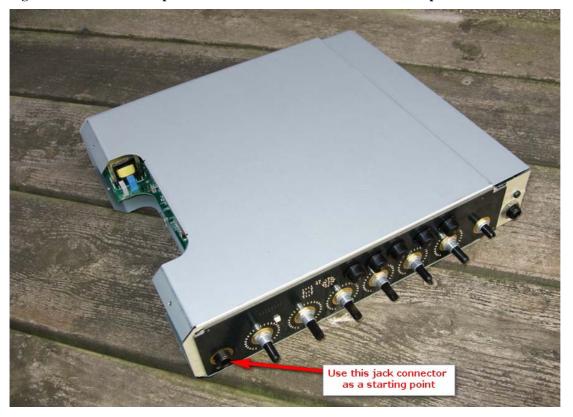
Fit the top assembly to the main board assembly as shown in the picture. Use the jack connector on the main board as a starting point.
